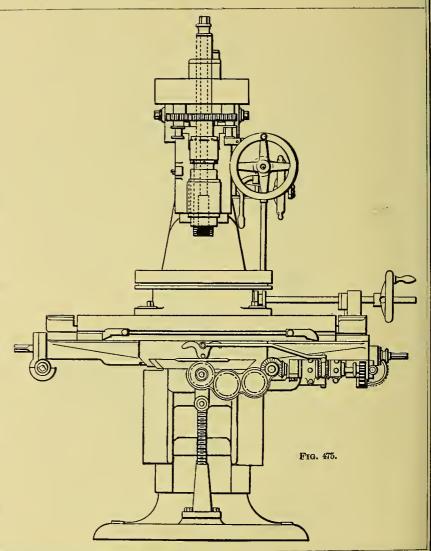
shows the front view of this machine, and Fig. 476 shows the side elevation. The whole machine is an advanced type of a modern milling machine and produces an impression of strength and neatness of design.
